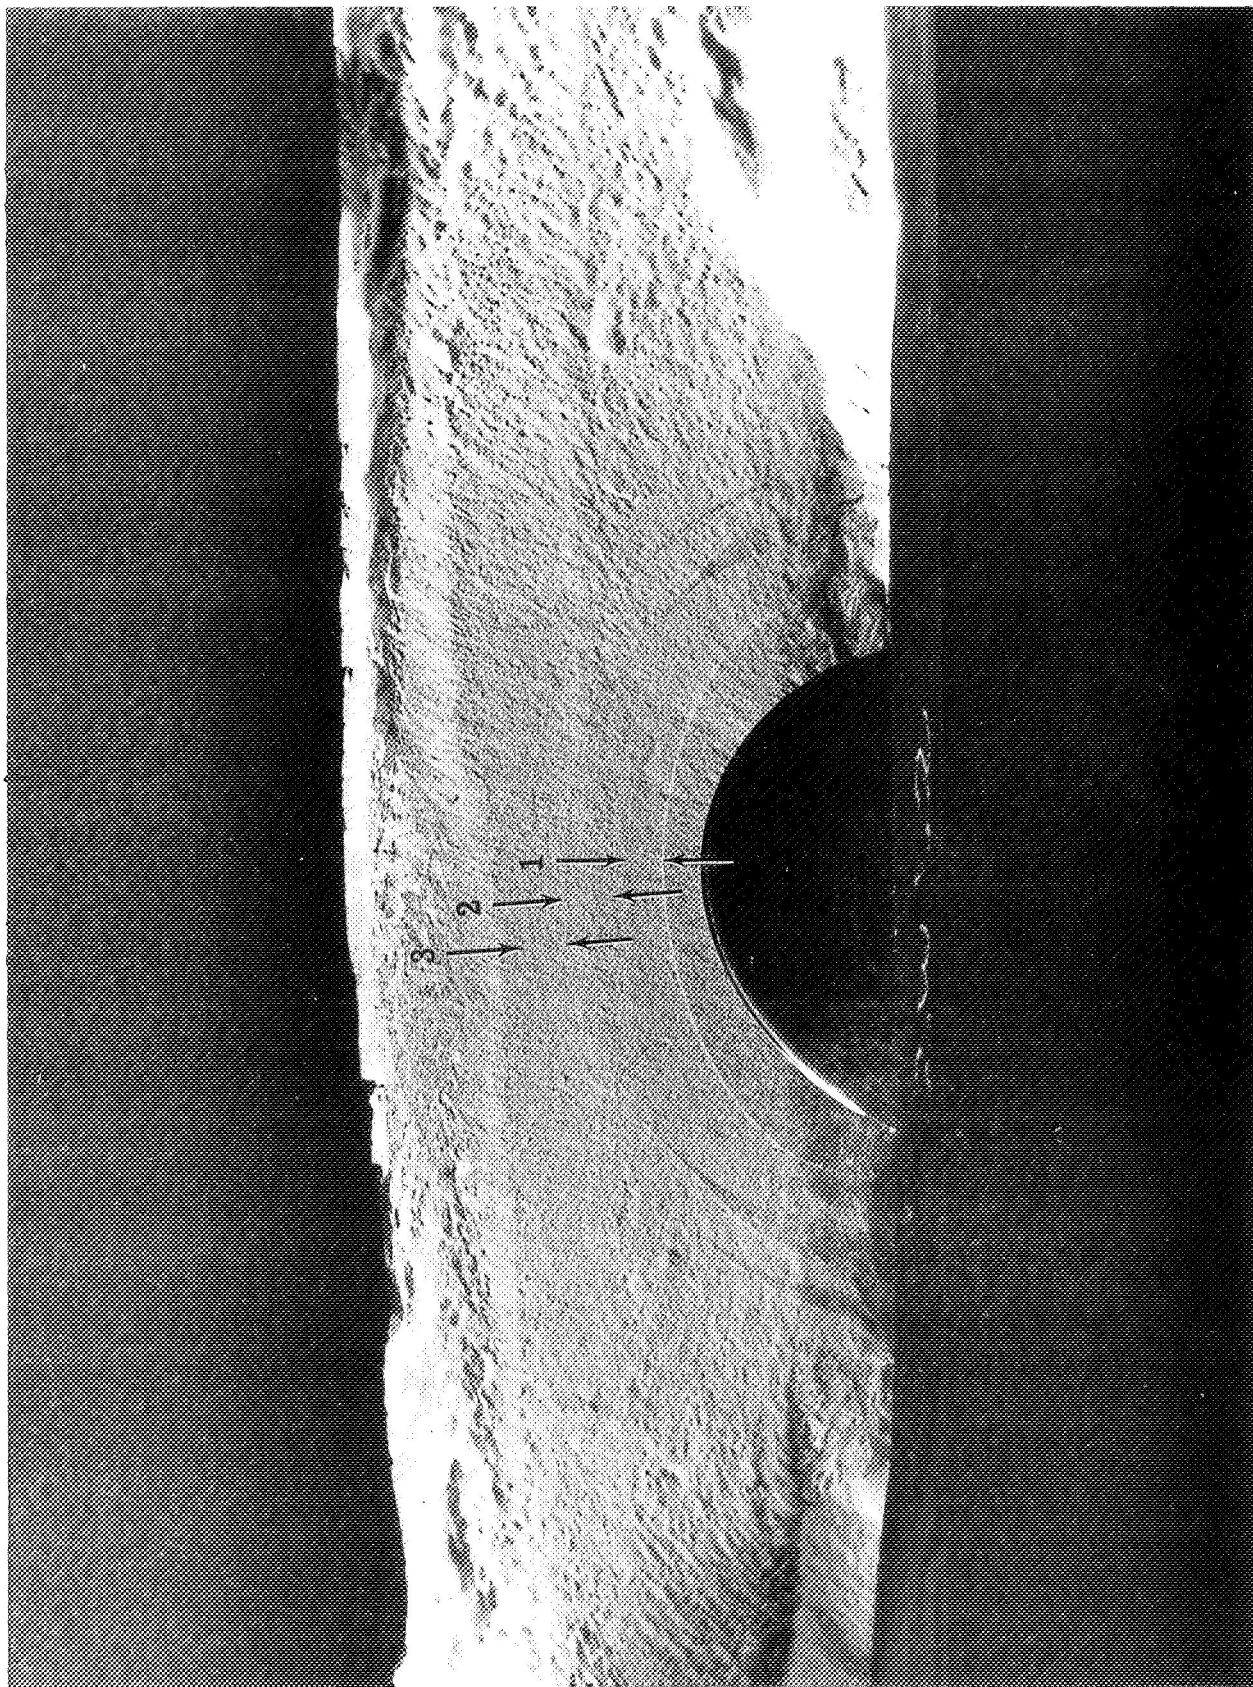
Fracture Face of Fatigue - Marked 2021-T81 Cyclic Fracture-Toughness Specimen
